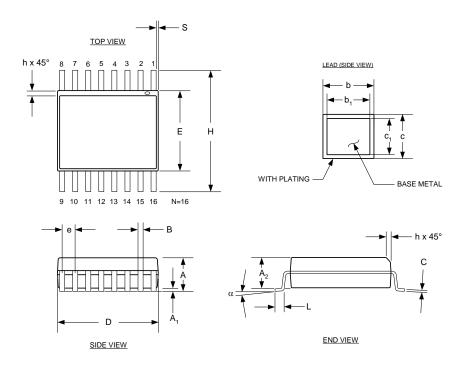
Package Outline Drawing SSOP16, 150 MILS, 0.635mm (0.025 inch) pitch
